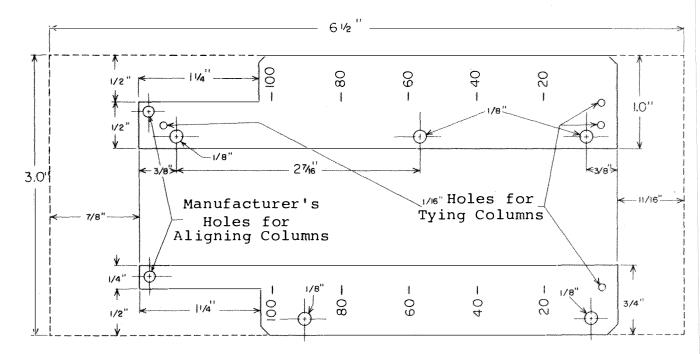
MODIFICATION OF THERMOMETER SCALE PANEL.
